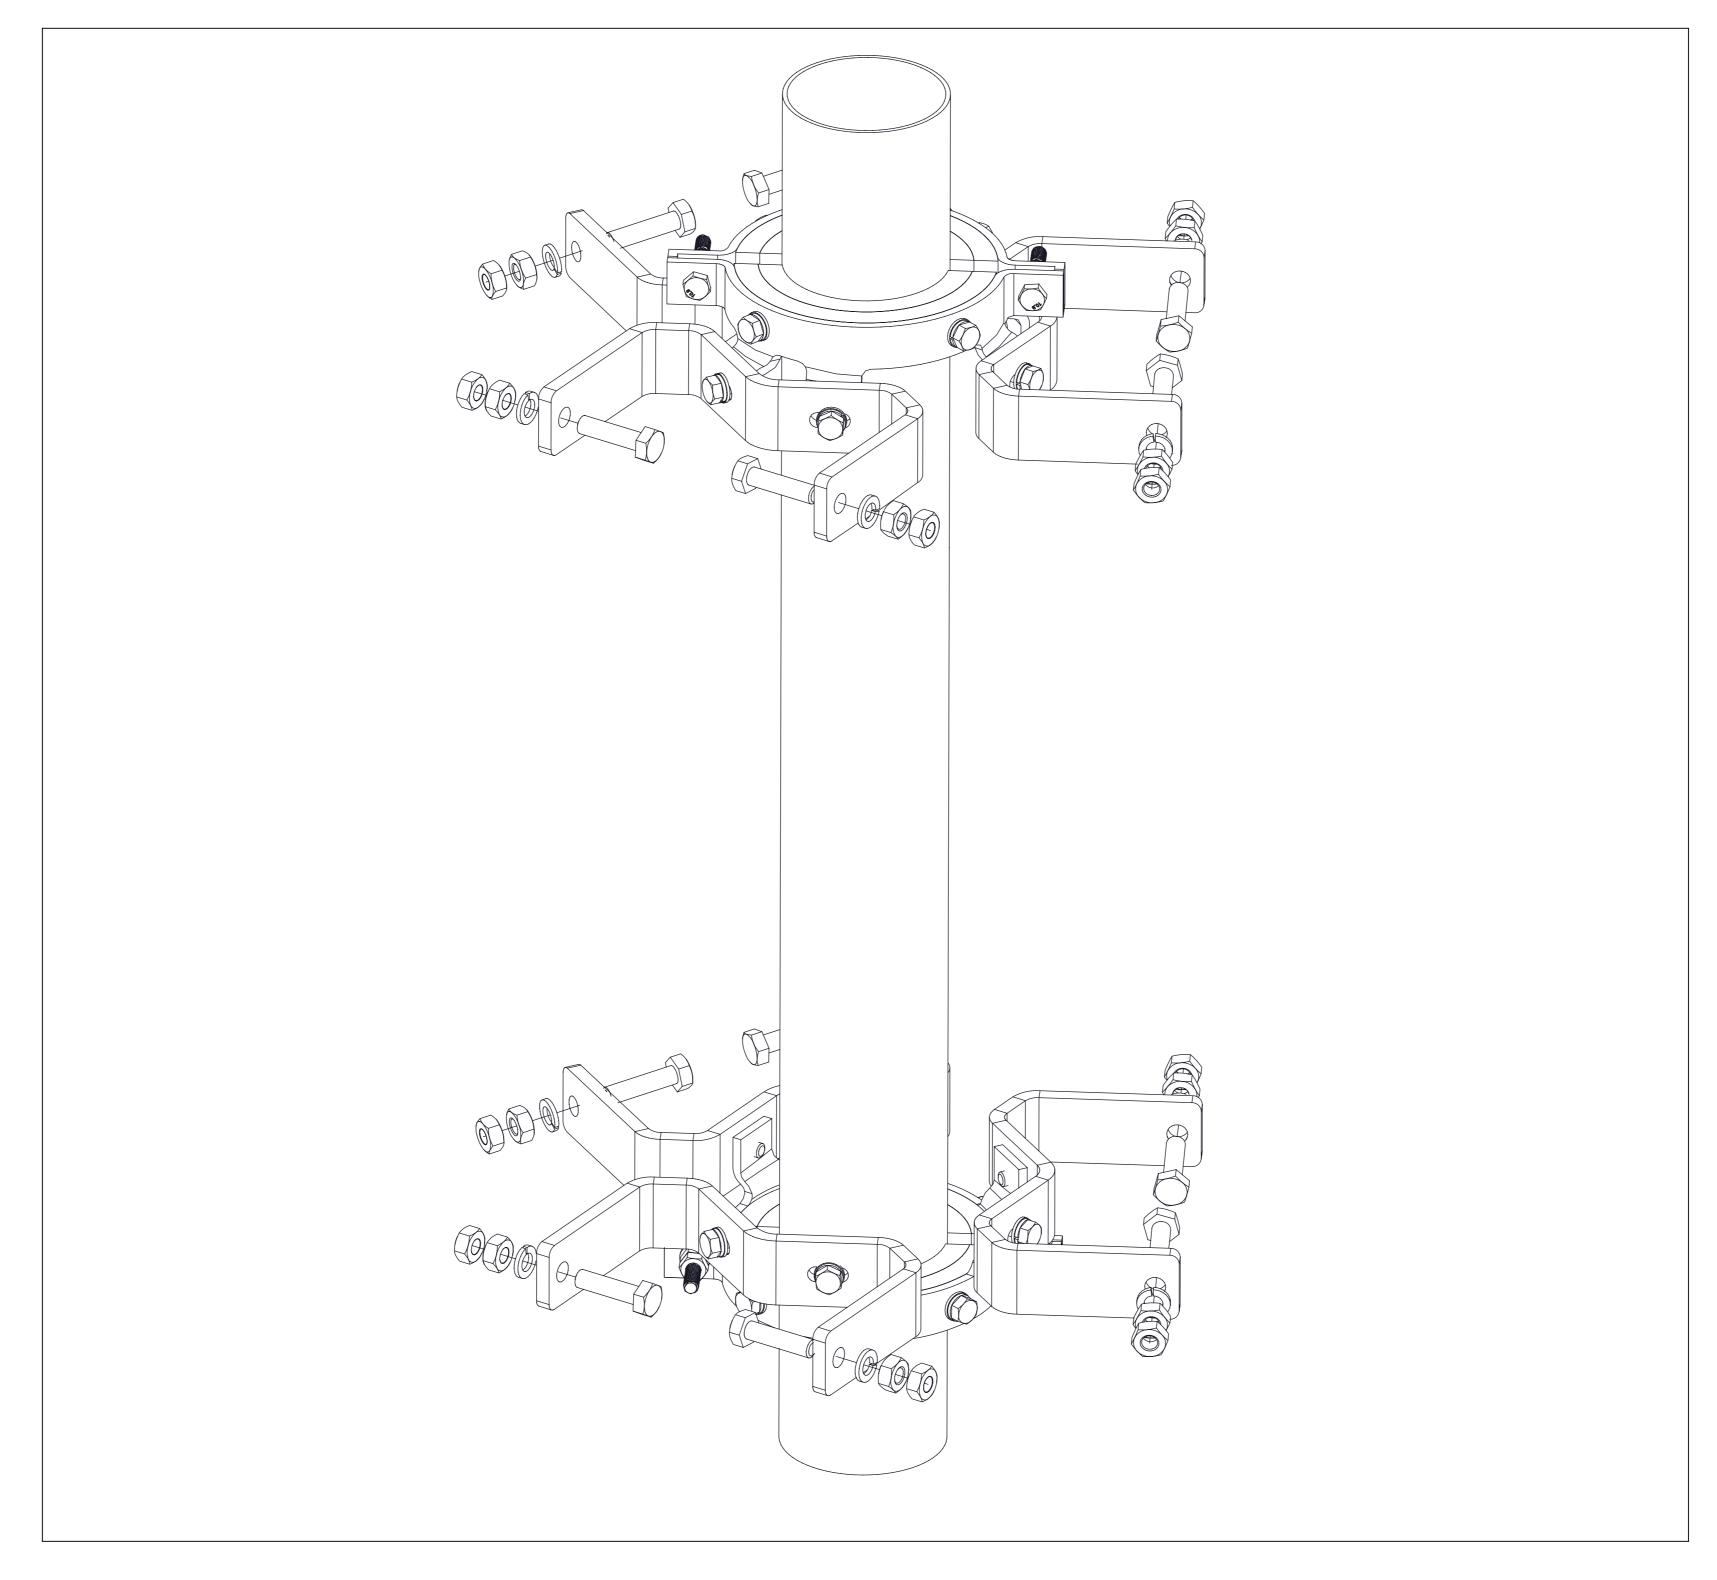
Top and Bottom Hardware Assembly for 88.9mm(3.5") Pole.
